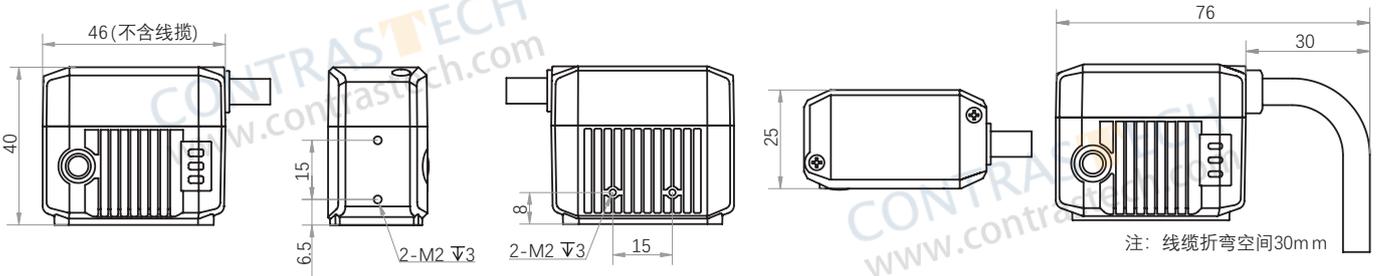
Mechanical Dimensions (in mm) of the solid-state vari focal type code reader with 46 * 40 * 25 mm housing(There is no focus knob on the back of the device, and the focusing distance can be adjusted via vari focus lens).
